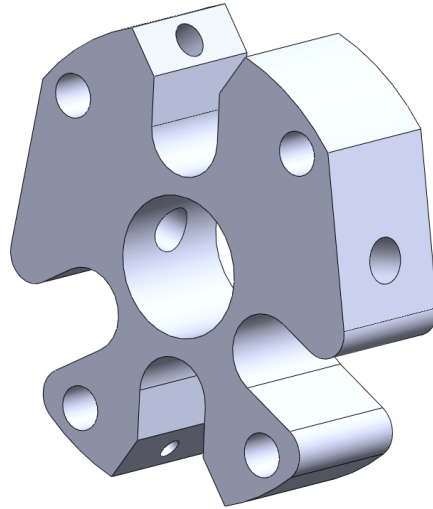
Holder that connects the on-axis electron gun to a flange. It has an outer diameter of 34 mm.
